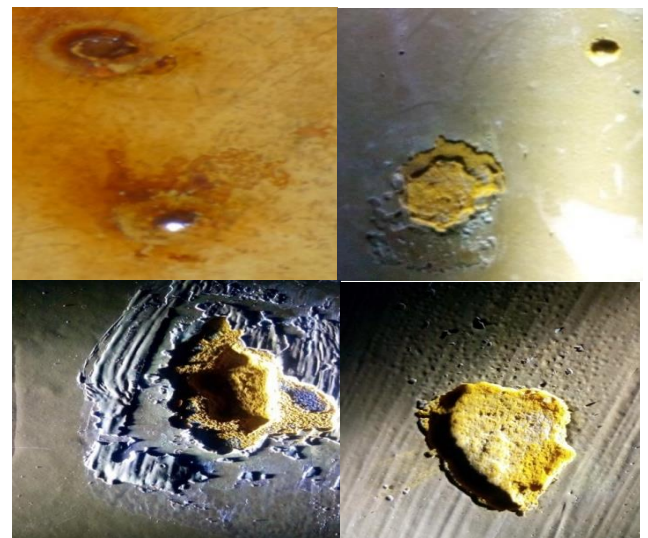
Typical tank coating pitting erosion caused by Galvanic impact.
